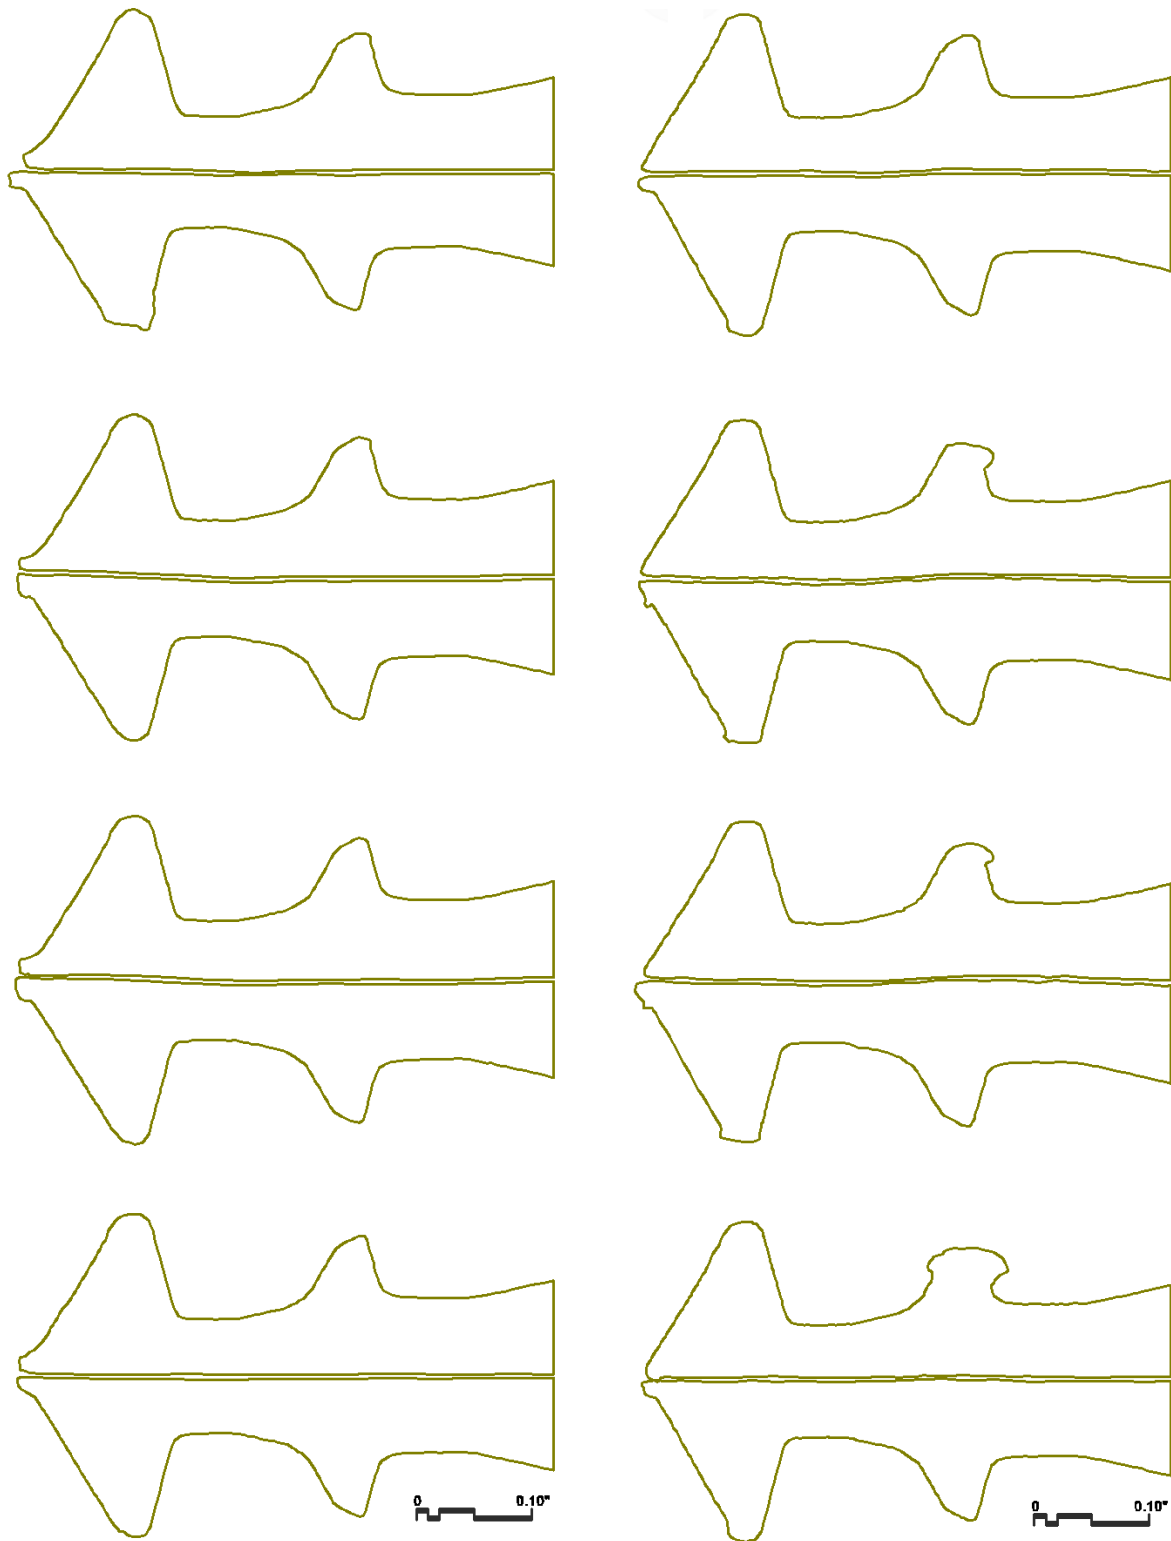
As-Built 0.120 in. Tube-C Coined Pressed-End CAD Generation - Step 4
